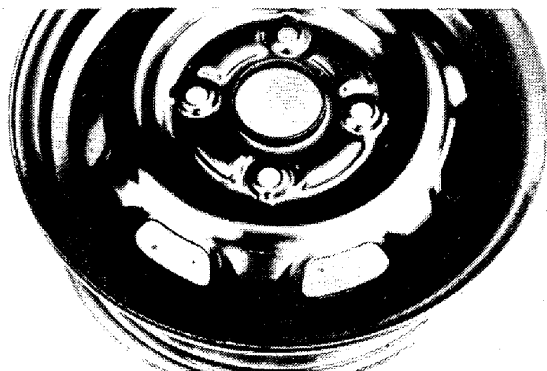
An example of wheel which consists of high strength steel disc and mild steel rim.
